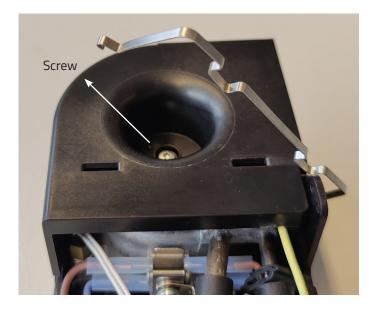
Boiler unit is attached to the inner housing using a screw. The screw passes through the top and bottom cover, clamping them together
